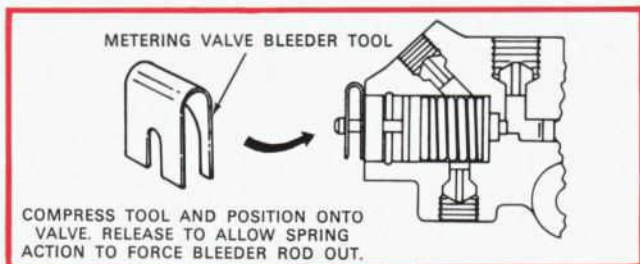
Note the metering valve bleeder tool holding the metering valve release rod in the outward position. This special tool is necessary when bleeding the brake hydraulic system on disc brake equipped models.
